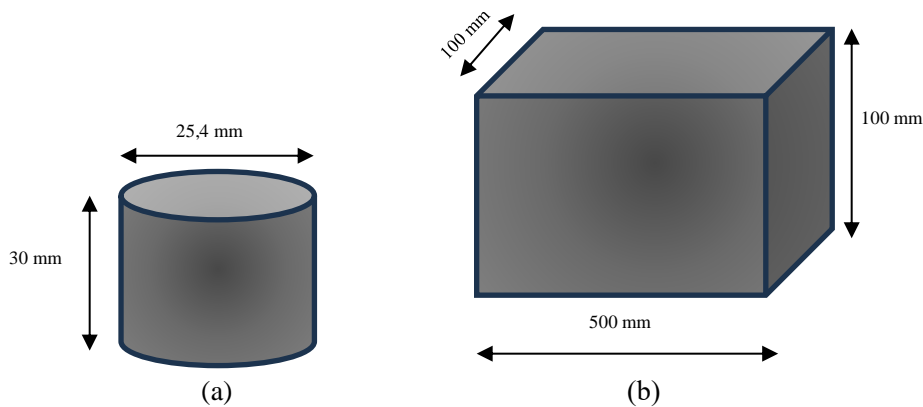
(a) specimen of pack carburizing; (b) vessel for pack carburizing process
